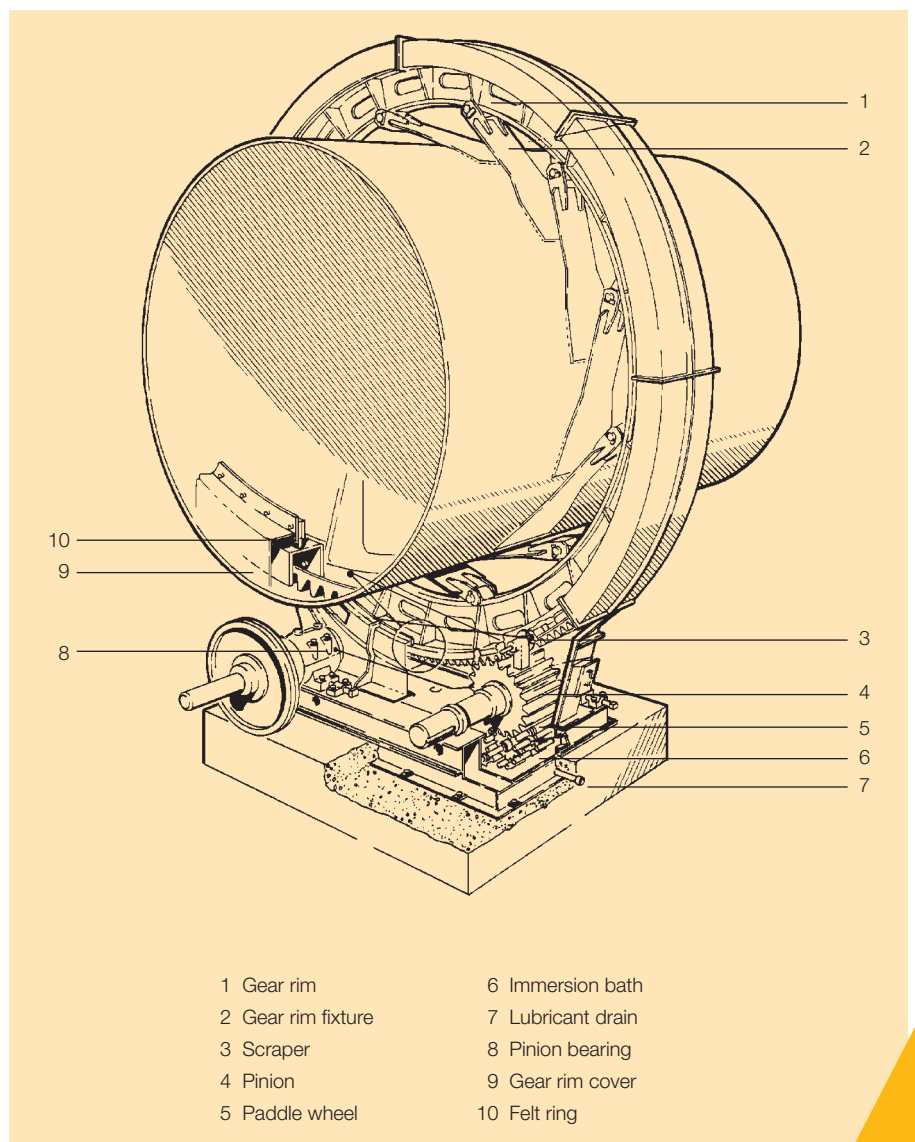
Paddle wheel lubrication, double-pinion kiln drive by FLS
